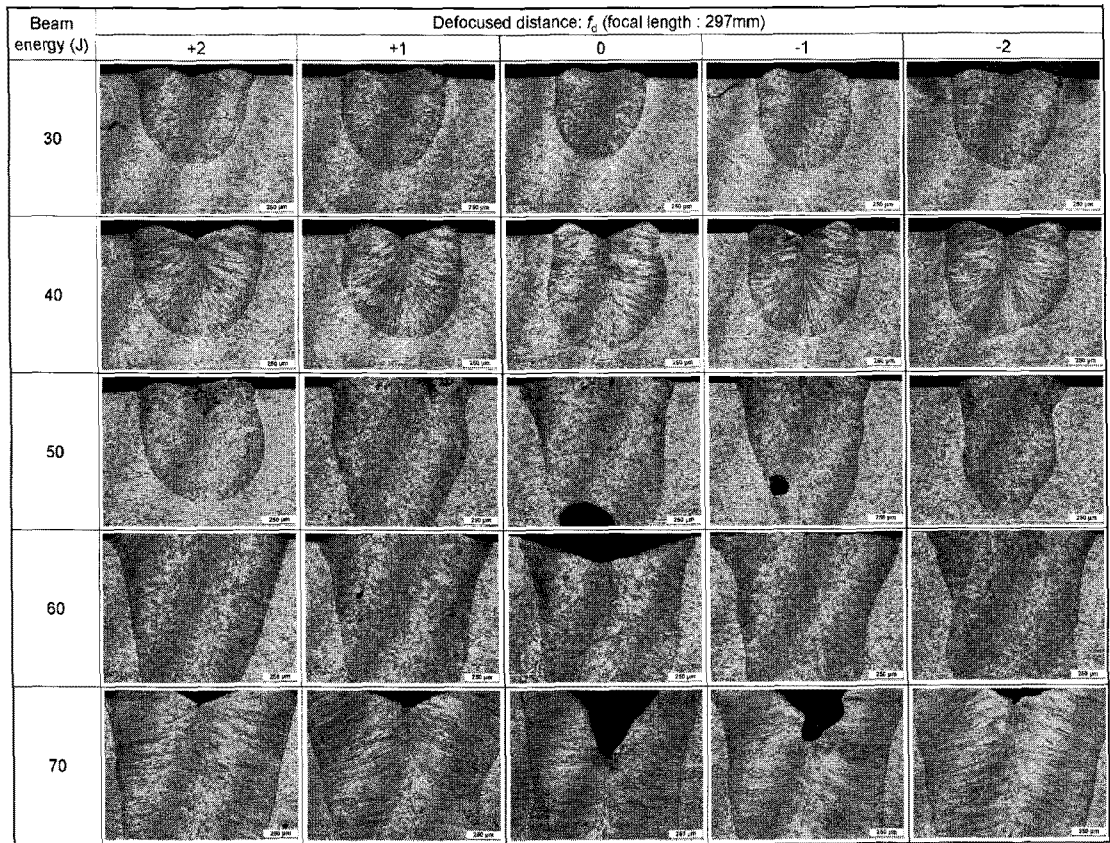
Cross section of weld zone with beam energy and defocused distance
